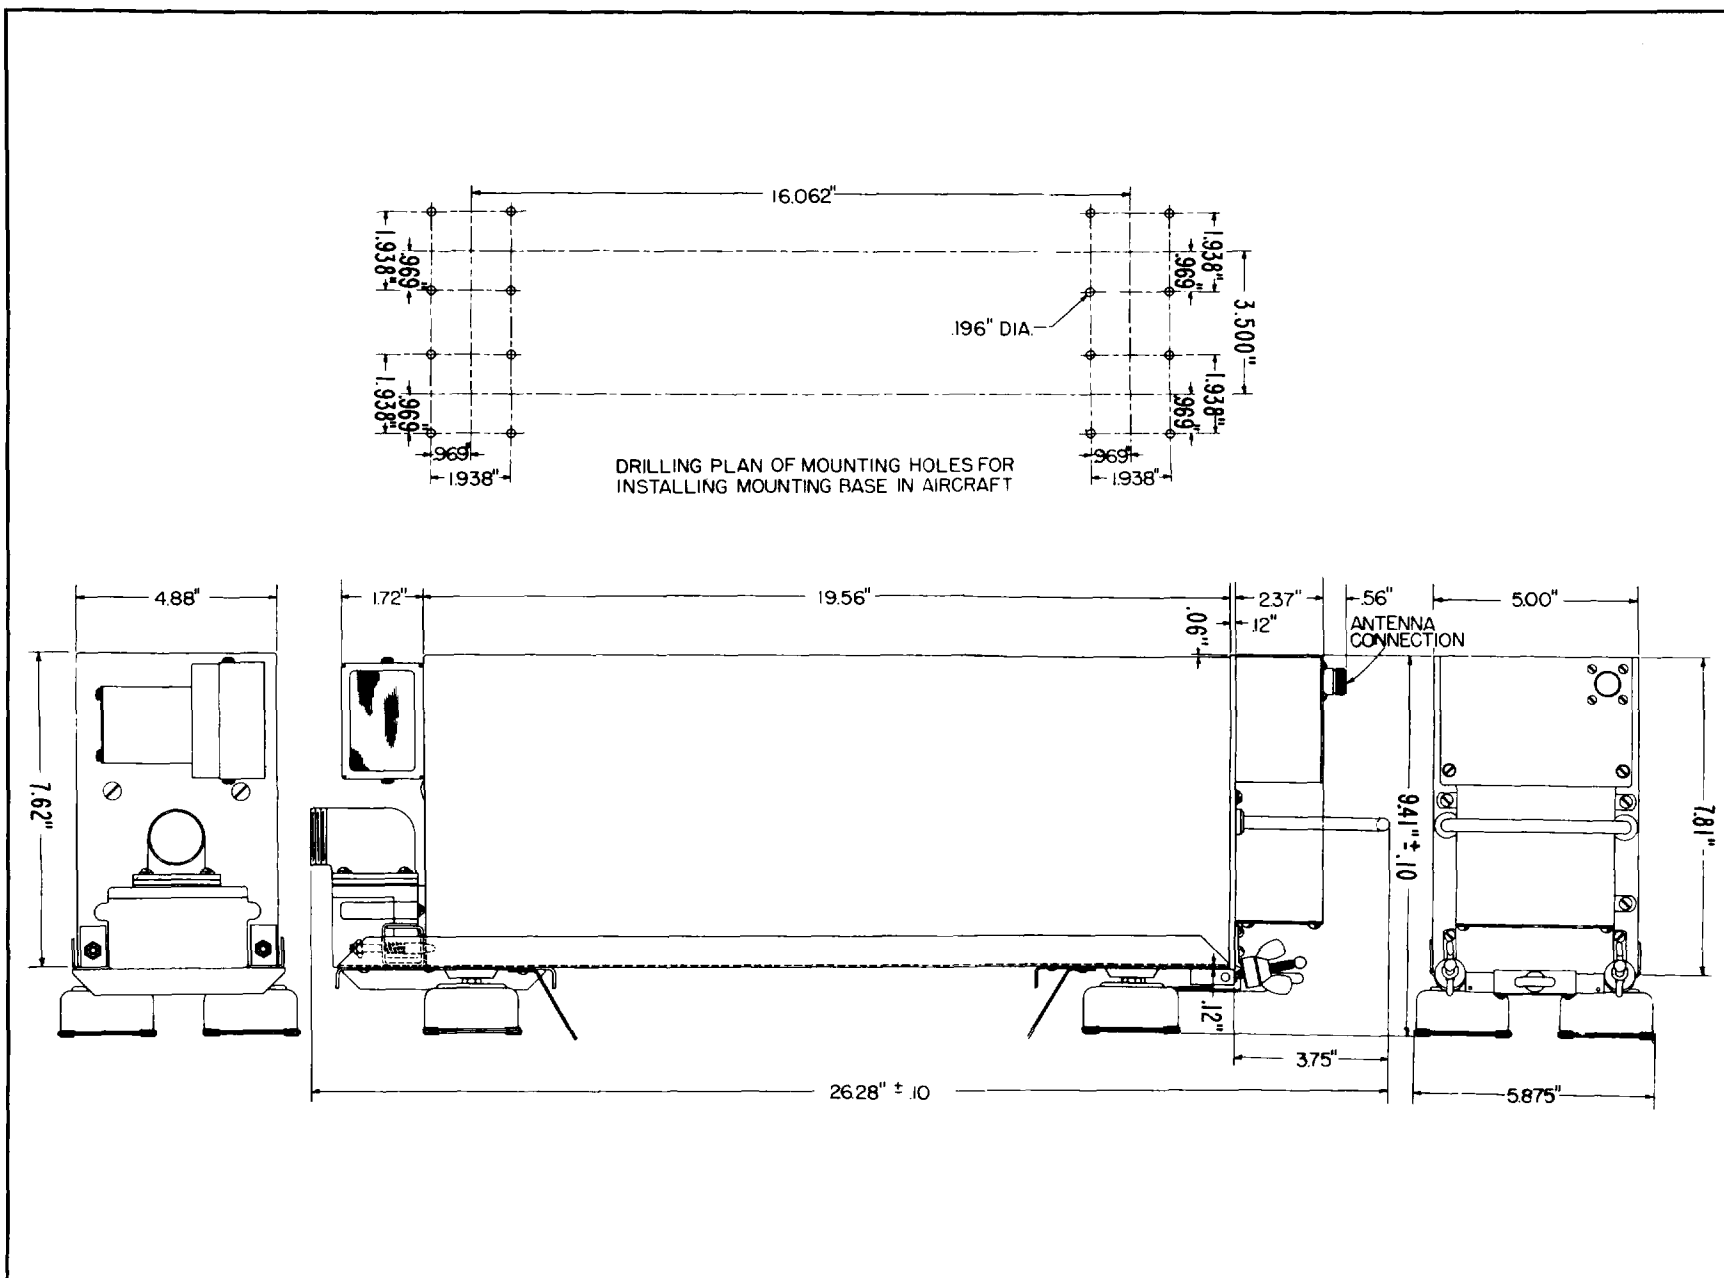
Radio Receiver R-252/ARN-14 and R-252B/ARN-14 with Mounting MT-627/ARN-14, Outline and Mounting Dimensions
